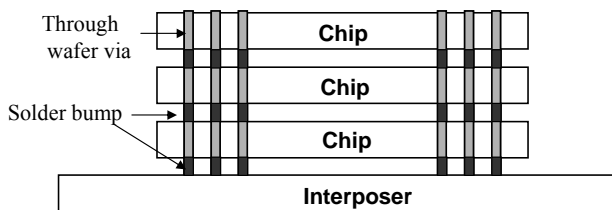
Cross-section view of the through wafer via in 3-D chip stacking package.
